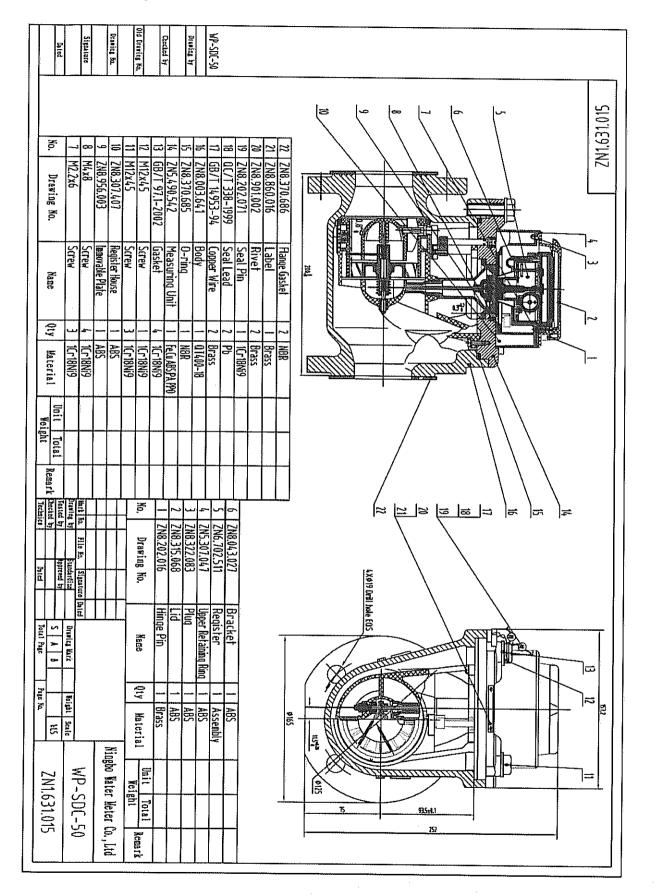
The water meter type WP-SDC DN 50 with Cooper Can Register assembly drawings:
